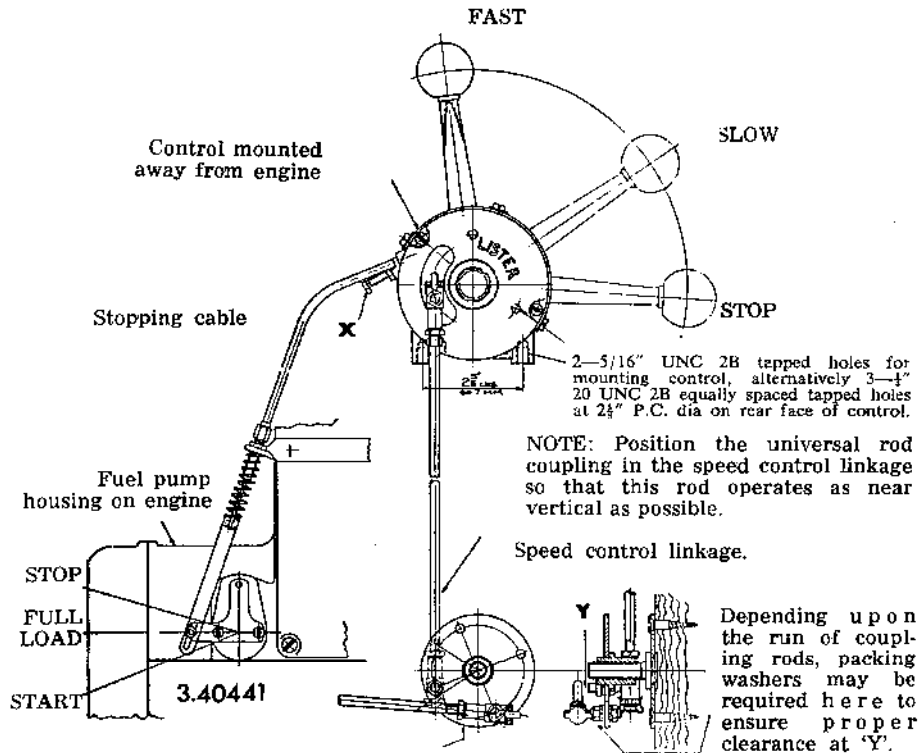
Arrangement of Single Lever Speed and Stop Control
